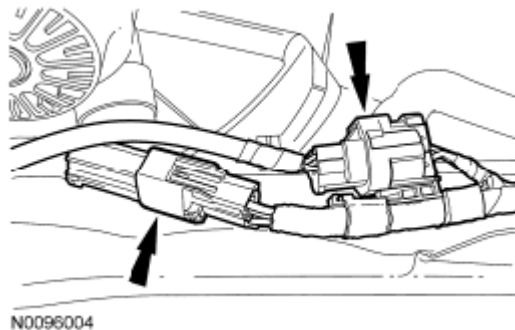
Locating Electronic Power Assist Steering System Electrical Connectors
